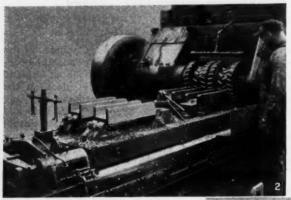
The production on this job is from 45 to 60 pieces in eight hours. Fig. 3—Drawing of side rod bushing with expansion grooves. Fig. 4—Using a Morton keyseating machine to cut expansion grooves in side rod bushings.
